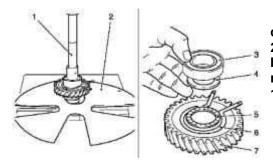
Removing the components of 1-th transmission: 1, 2 - a special tool, and 3 - ball bearing, 4 - thrust washer, 5 - Axial needle bearing, 6 - circlip; 7 - gear 1-th transmission
